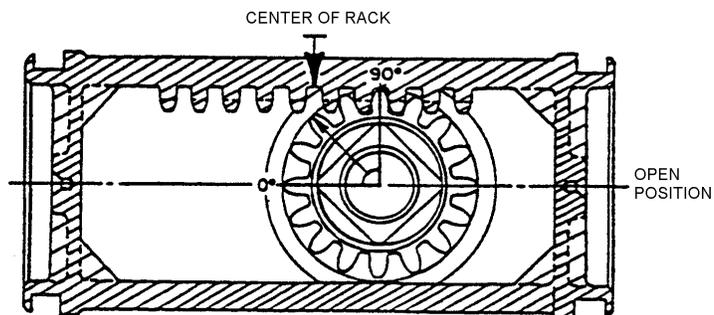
PISTON GEAR/RACK AND TORQUE PLUG ALIGNMENT FOR 301D-SRXX-M3HW
